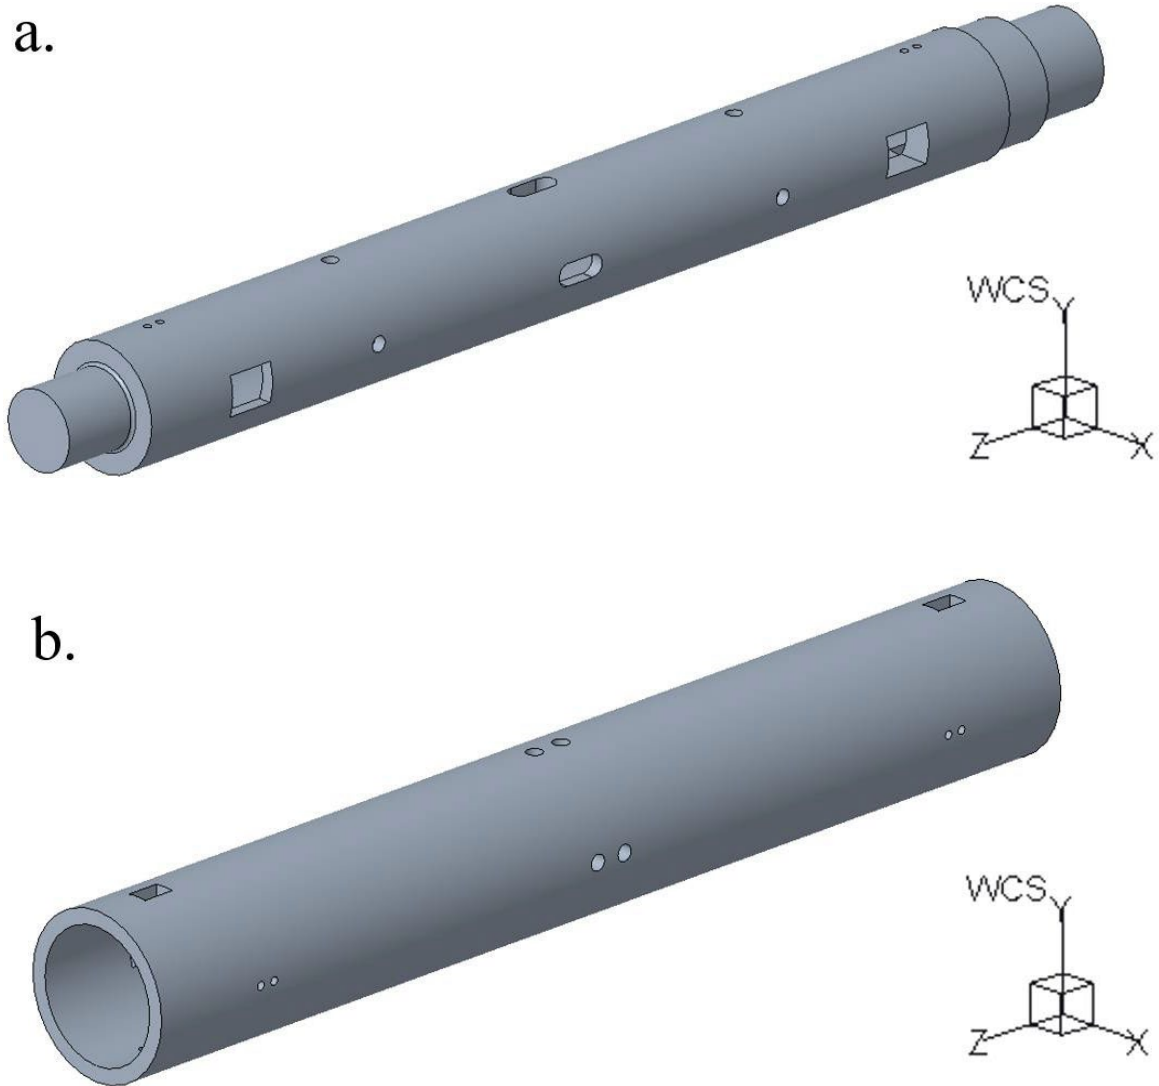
CAD geometry of cross-sectional view of force balance with exterior components. (a) Inner rod. (b) Outer sleeve.
